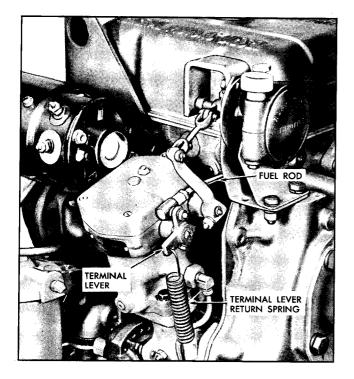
Hydraulic Governor Mounted on Series 53 Engine
